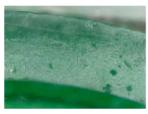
Blank gear oriented horizontal top surface-edge left and surface-edge bottom right
